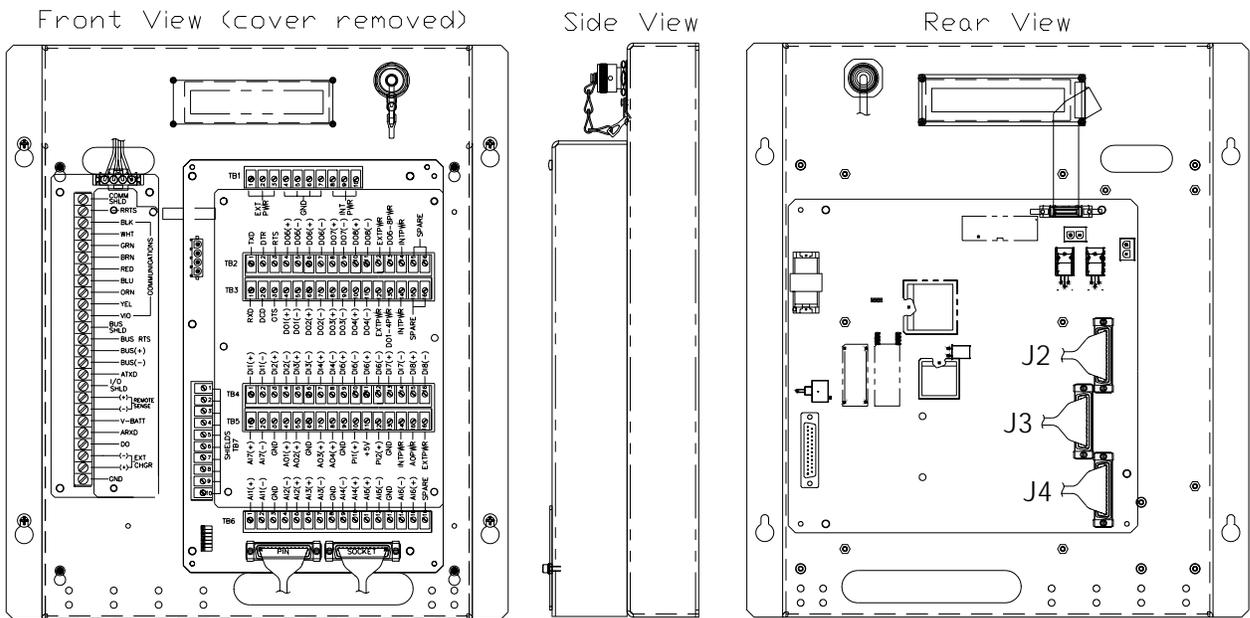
2 6790 RTU Wall-mount Enclosure Layout.
